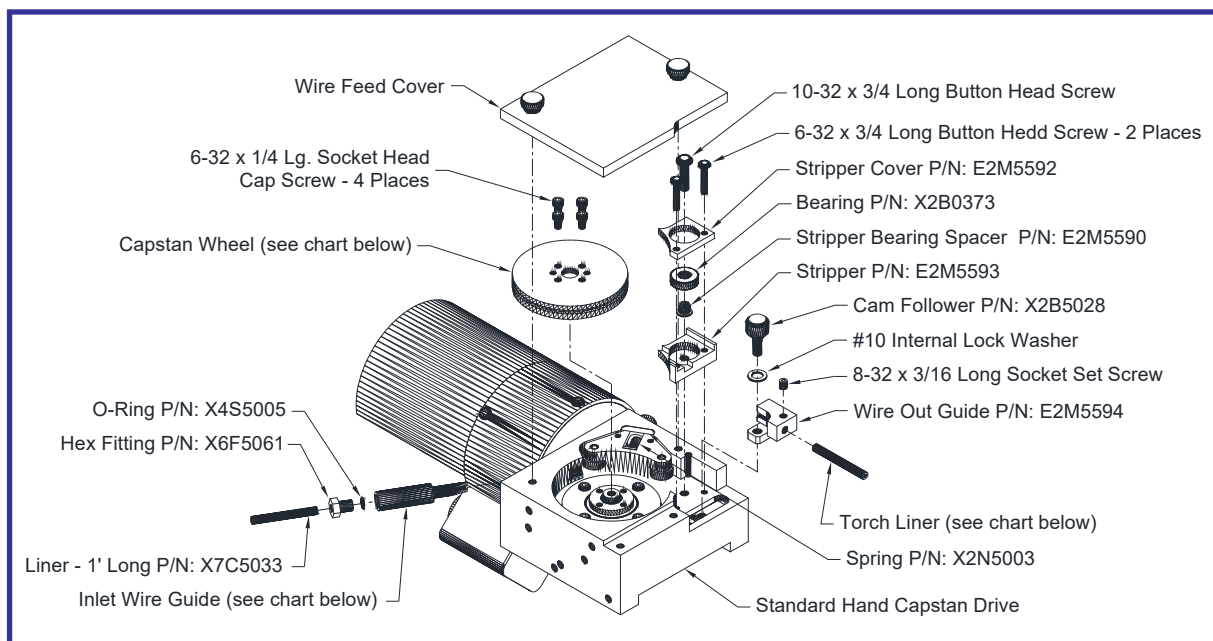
Steel Alloy Standard Hand Wire Drive Configuration
